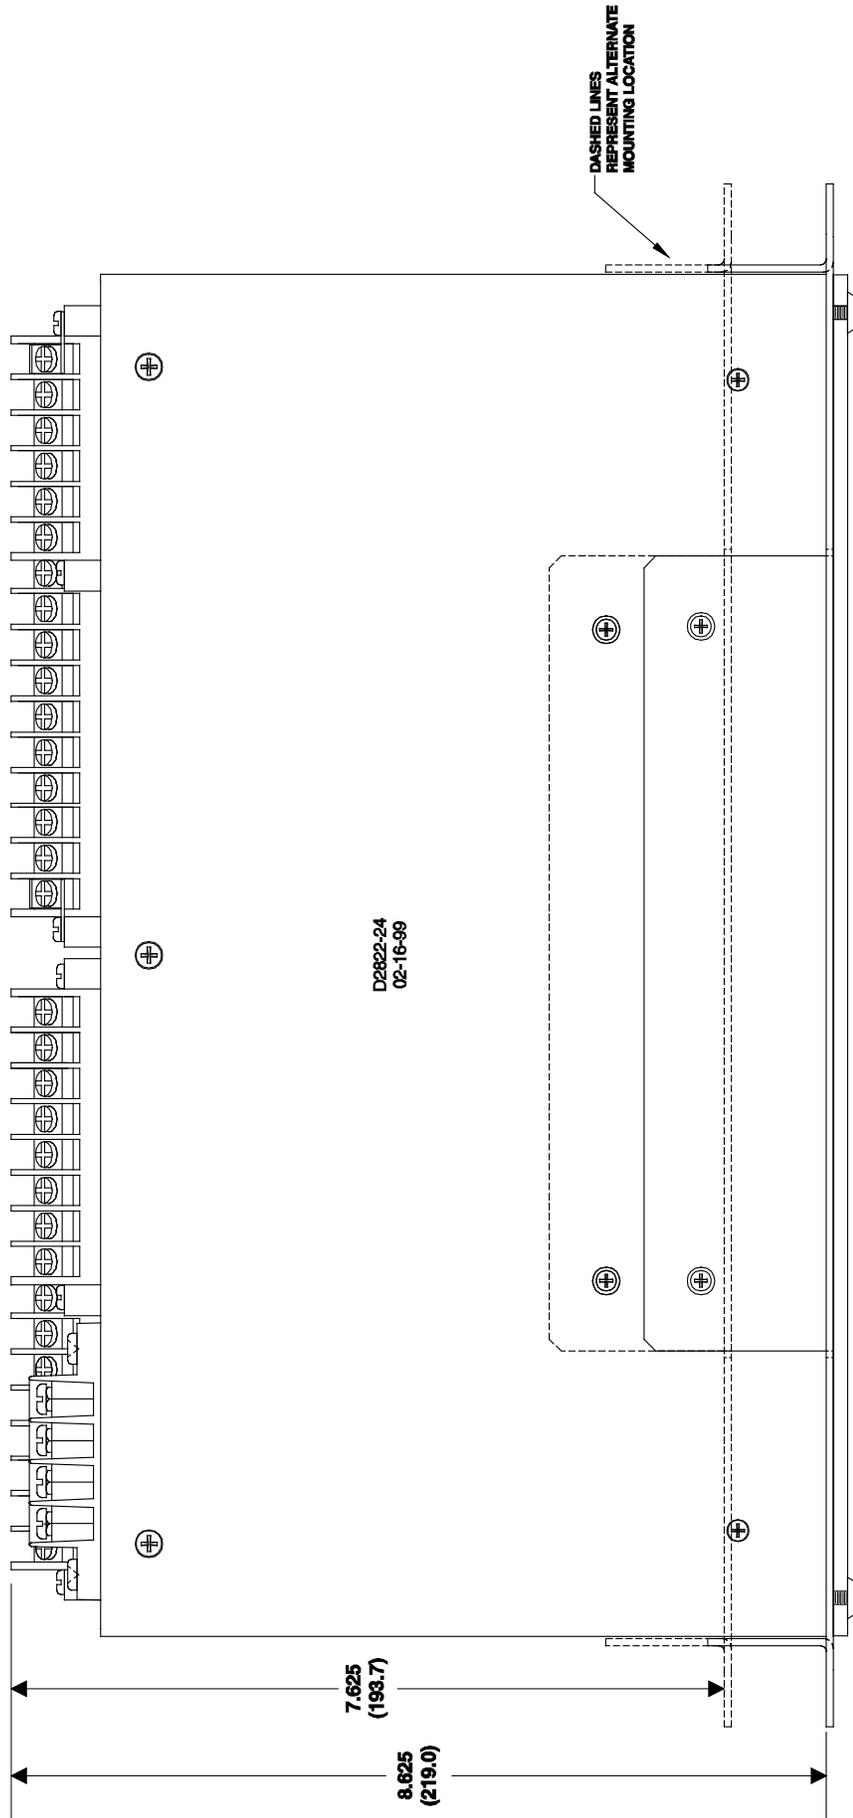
Panel Mount PSS-100 Outline Dimensions, Top View
